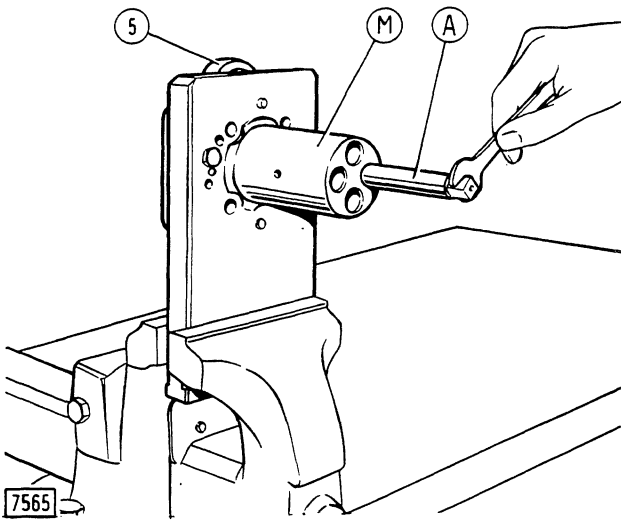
Reaming hydraulic pump shaft bushing bores (4 and 5, Fig. 34).
